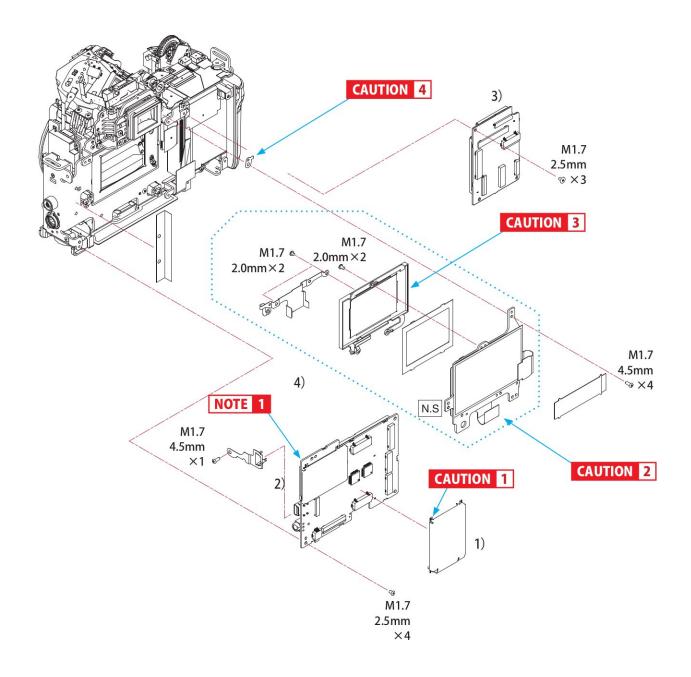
Digital PCB / Camera PCB / Imaging Unit Removal
